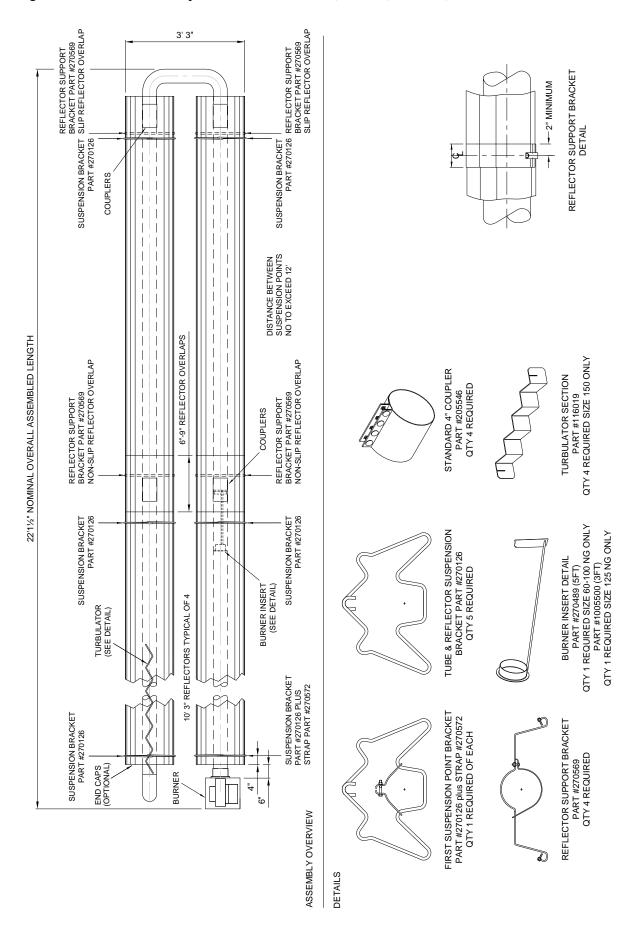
Heater Assembly: Model U tube 125-U60, 150-U60, 170-U60 and 200-U60
